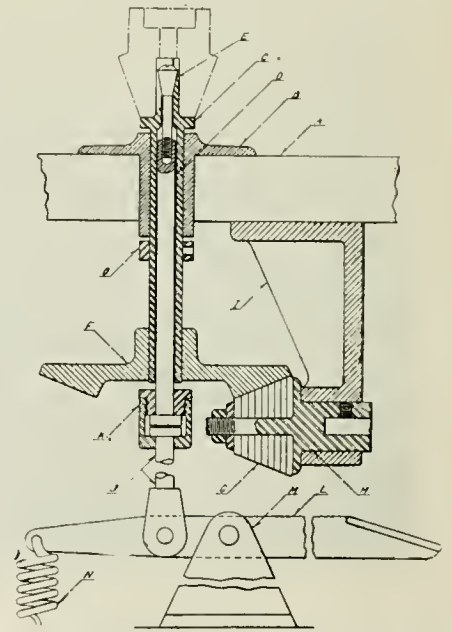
DEVICE FOR REMOVING BURR FROM EDGE OF PLATFORM.
